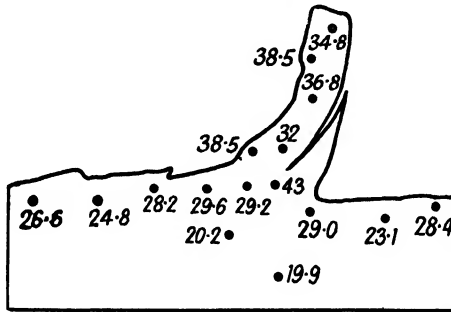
HARDNESS OF METAL MACHINING CHIP
